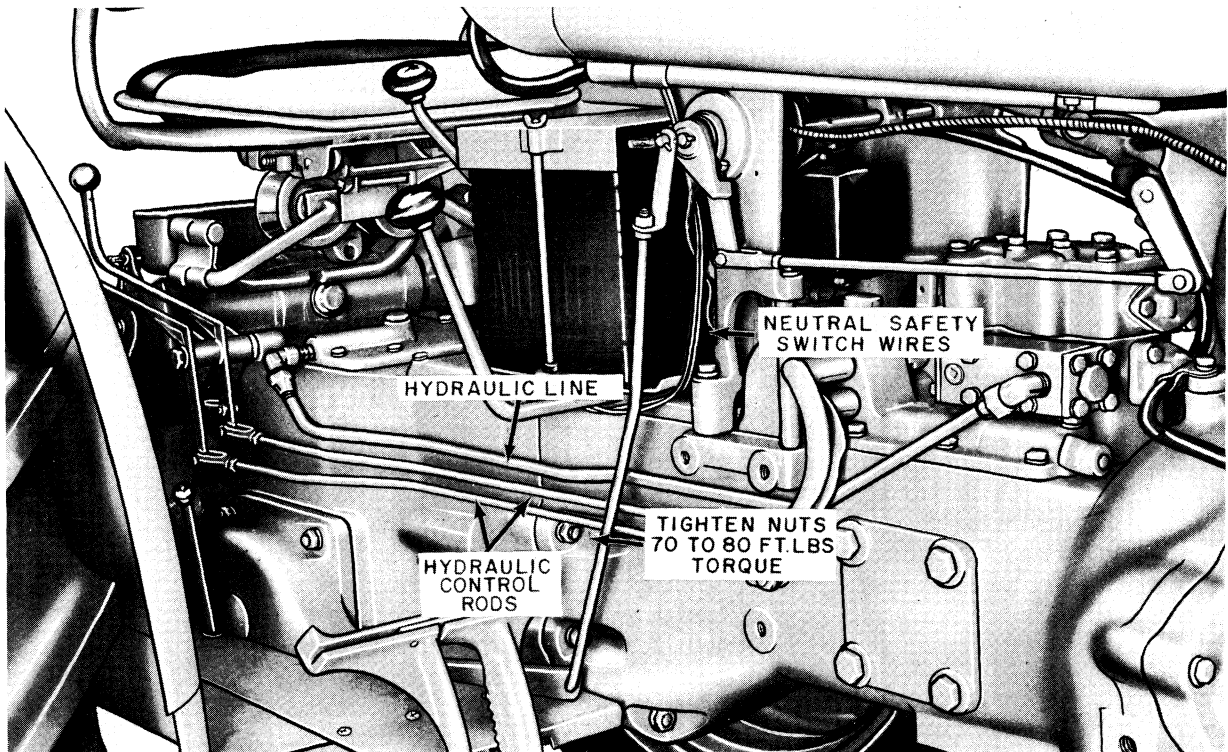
Parts Correctly Installed Right Side of Tractor at Rear of Torque Tube
